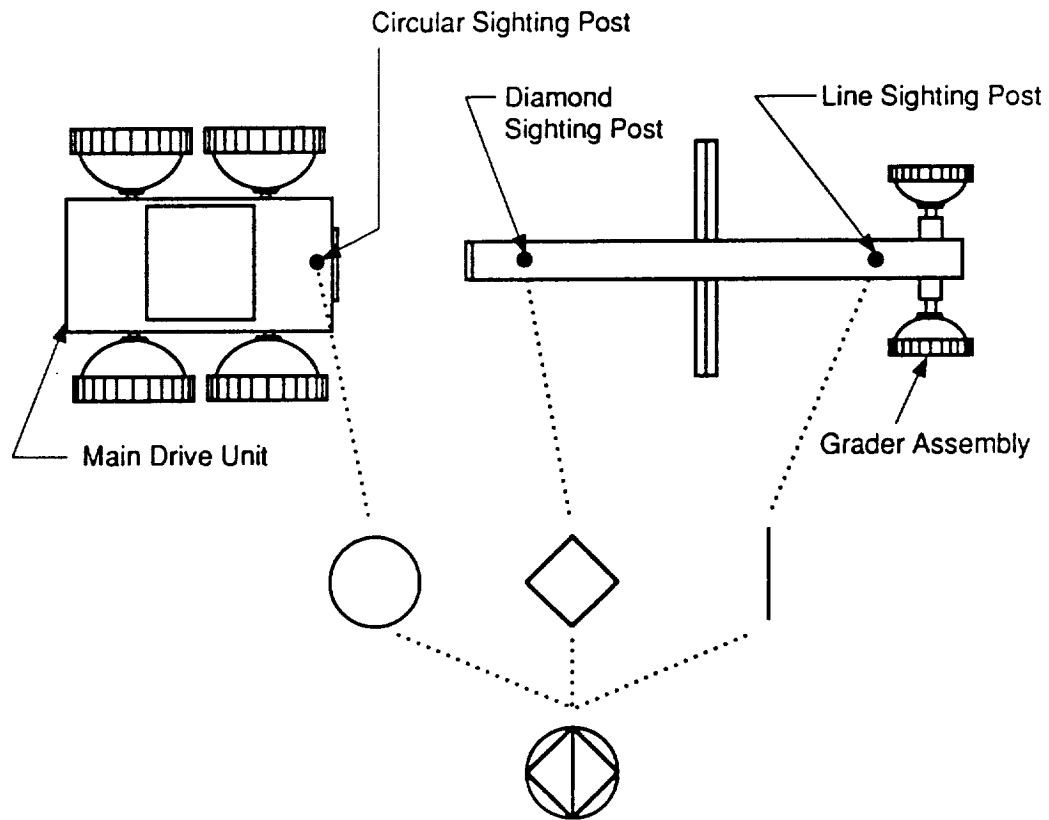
ALIGNMENT MECHANISM FOR JOINING DRIVE UNIT AND GRADER
